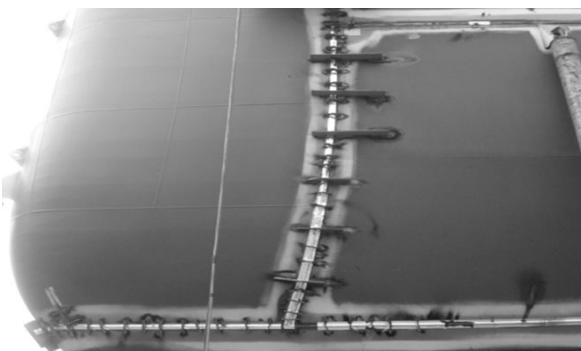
Set up pieces by welding at block erection stage.
